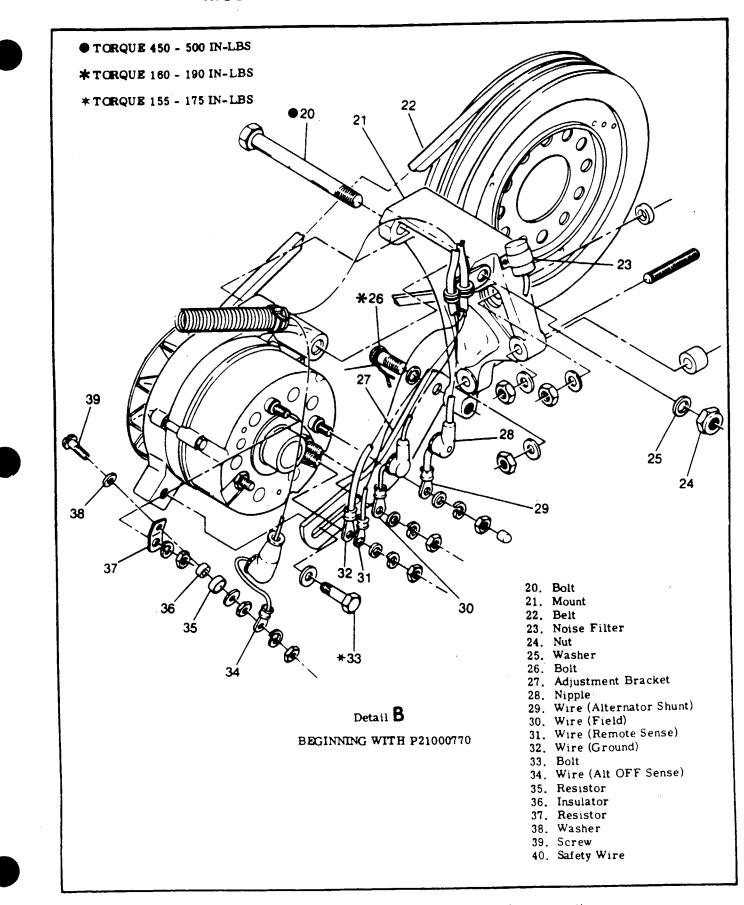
B. Dual Alternator System Installation (Sheet 4 of 8)
